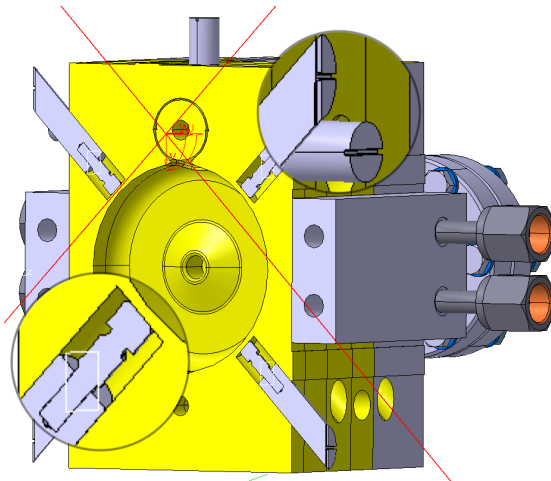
Tuning studs in assembly with the ceramic pins used to hold studs in position during brazing.
